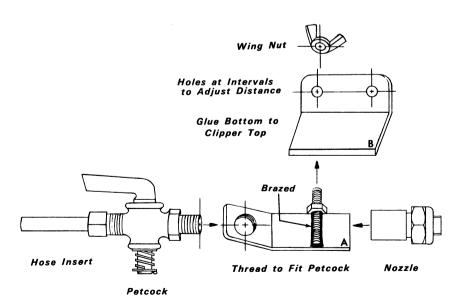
Nozzle assembly. Hose insert 5 cm long, 8 mm (5/16 in.) diameter attached to petcock; 50 \times 50 \times 3 mm angle iron, 18 mm long; hole drilled and threaded in angle iron A; rod brazed to angle iron A to provide friction surface, nut screwed onto rod. Angle iron B $25 \times 25 \times 3$ mm, 50 mm long, with two 6-mm diameter holes, drilled about one-third of distance from the top (holes provided to adjust position of valve and nozzle after assembly). Lower surface of angle iron B and top of clipper housing scored, then cemented together with filled epoxy resin. To assemble, angle iron A attached to petcock, then Tee Jet No. 1321 brass fan nozzle, 6.35 mm (1/4 in.) diameter attached to petcock. Threaded rod inserted into appropriate hole of angle iron B and secured with wing nut. Angular adjustment to direct the mist flow made by tilting the nozzle before tightening the nut.
